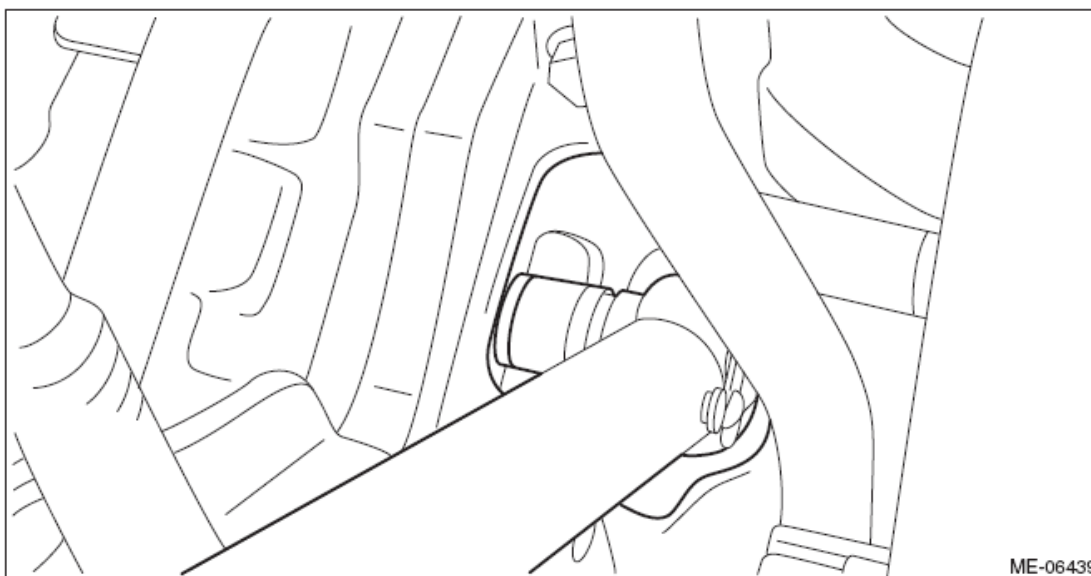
Installing Torque Converter Clutch To Drive Plate (CVT Model)
